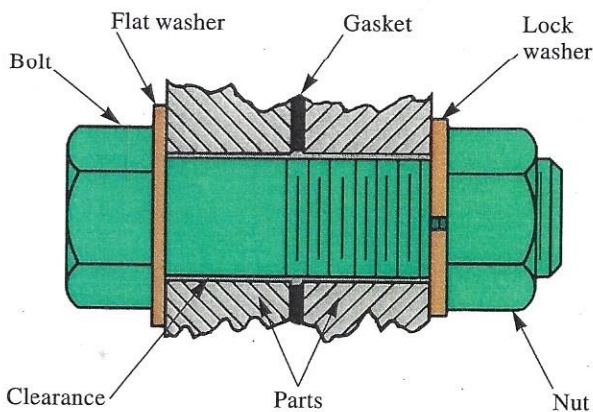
A bolt and nut apply great clamping force. Washers are used with nut and bolt. Note gasket between parts.
